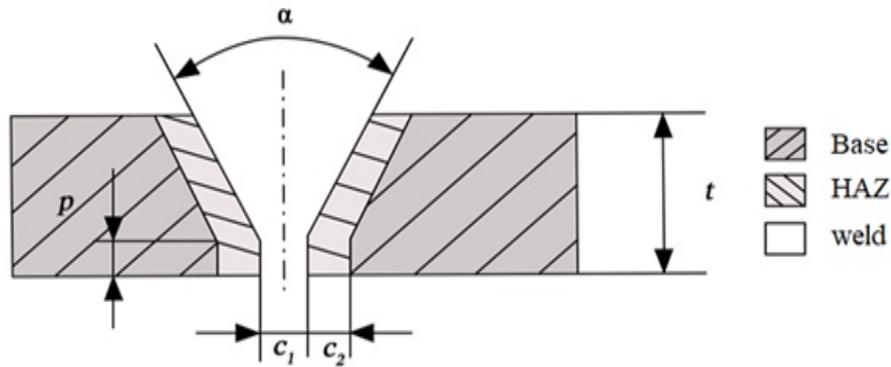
Schematic representation of the circumferential welded joint geometry
